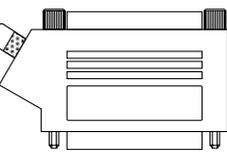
Dimensional sheet encoder branching DGA01.2
